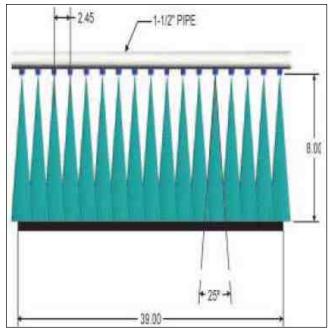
Flat spray nozzle manifold illustration using a 25° spray angle (Courtesy of Lechler, Inc., St. Charles, IL).
